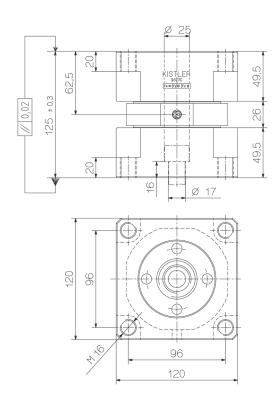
Dimensions of the triaxial load cell Type 9377C
